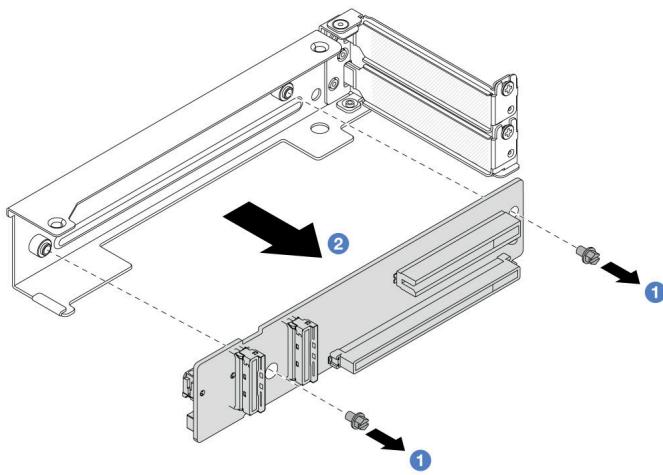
Removing the riser card from 4LP riser 3/4 cage
